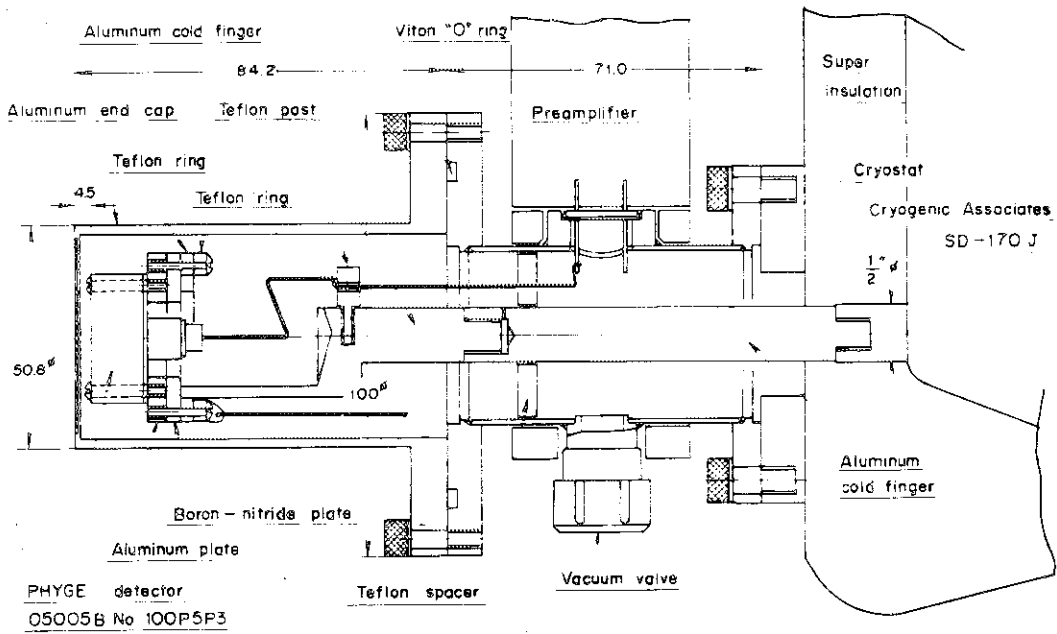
Mounting assembly for NRD PHYGE detector
